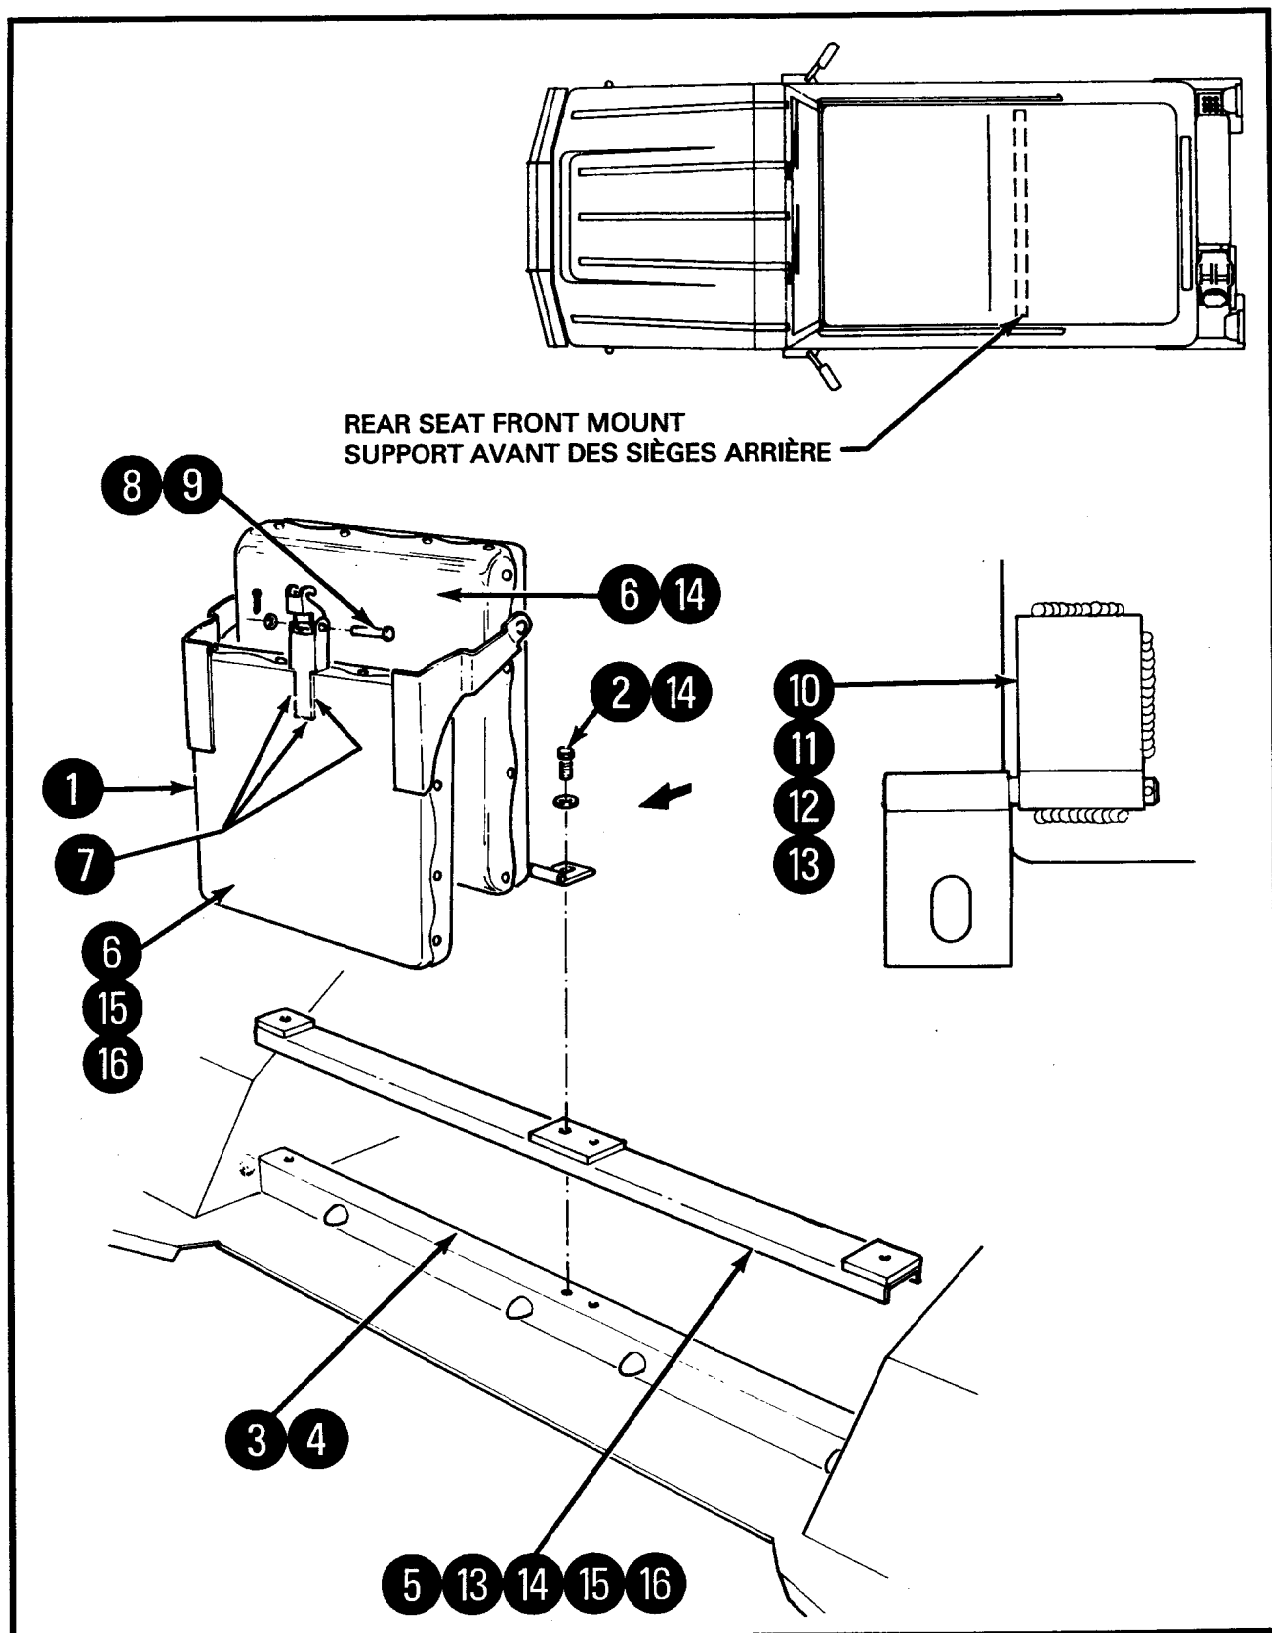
Repair of Rear Seat Front Mount, Hinges and latches
